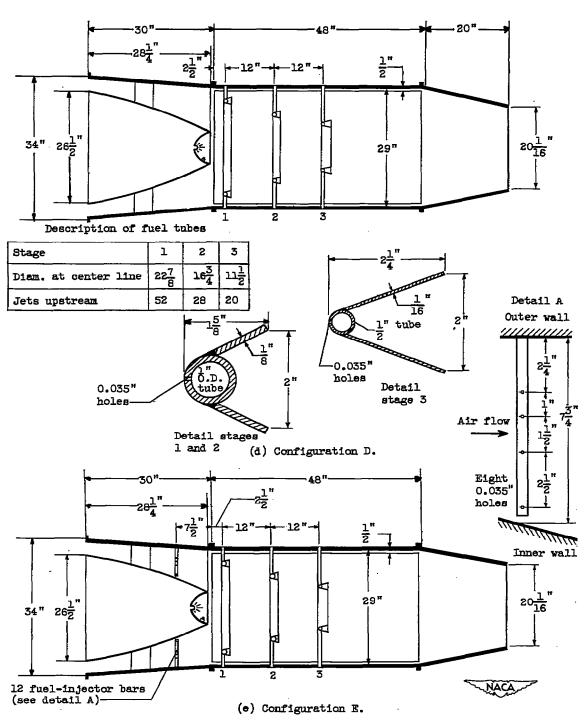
Concluded. Diagrammatic sketches of tail-pipe-burner assembly.
